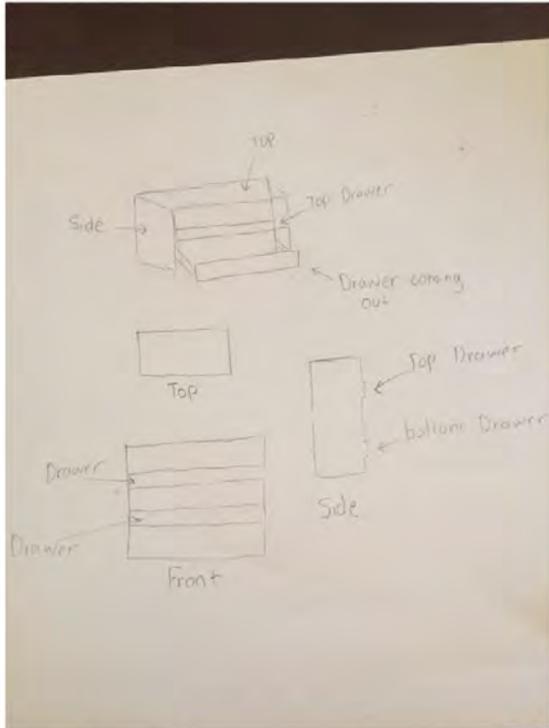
Design 2 includes two long drawers with 2 handles and will be constructed out of pine.
